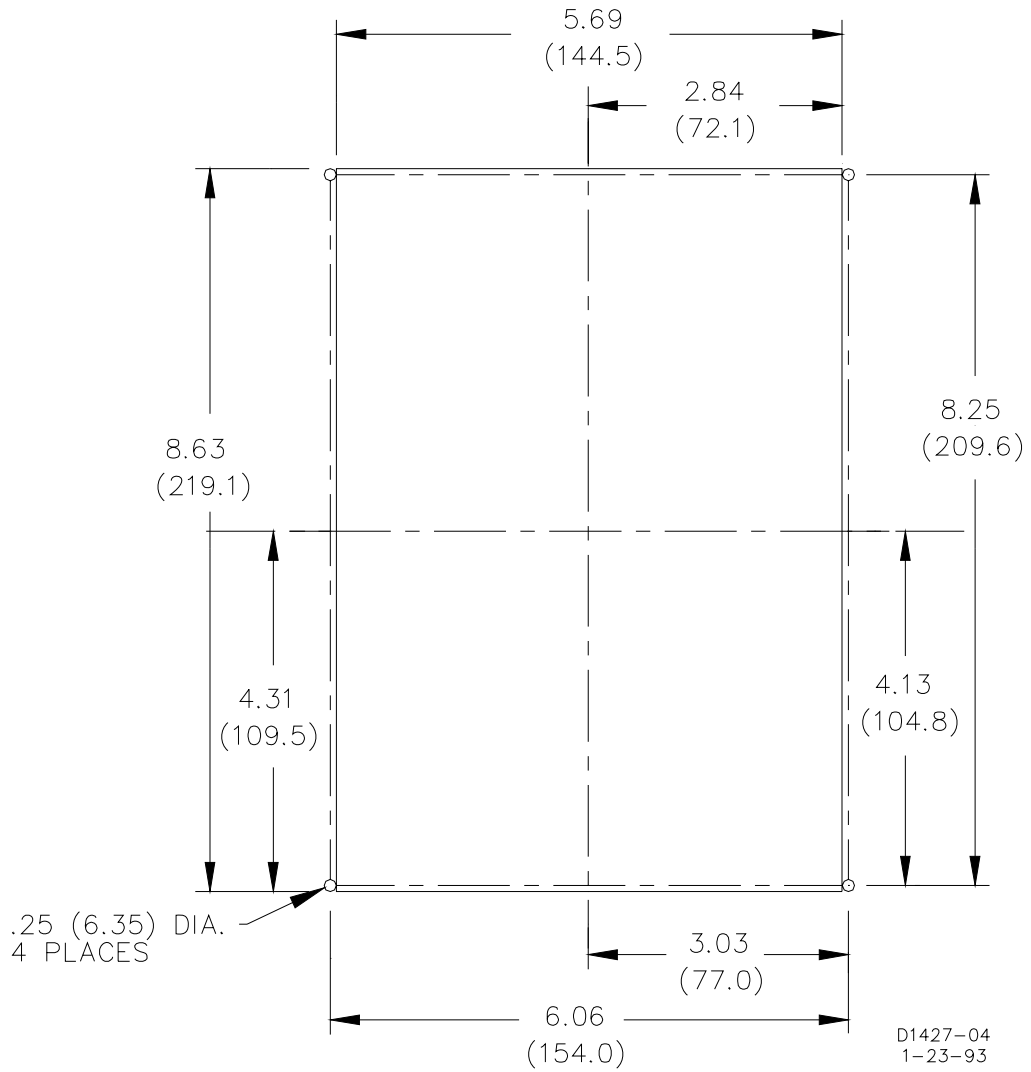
Cutout and Drilling Dimensions for S1 Case
